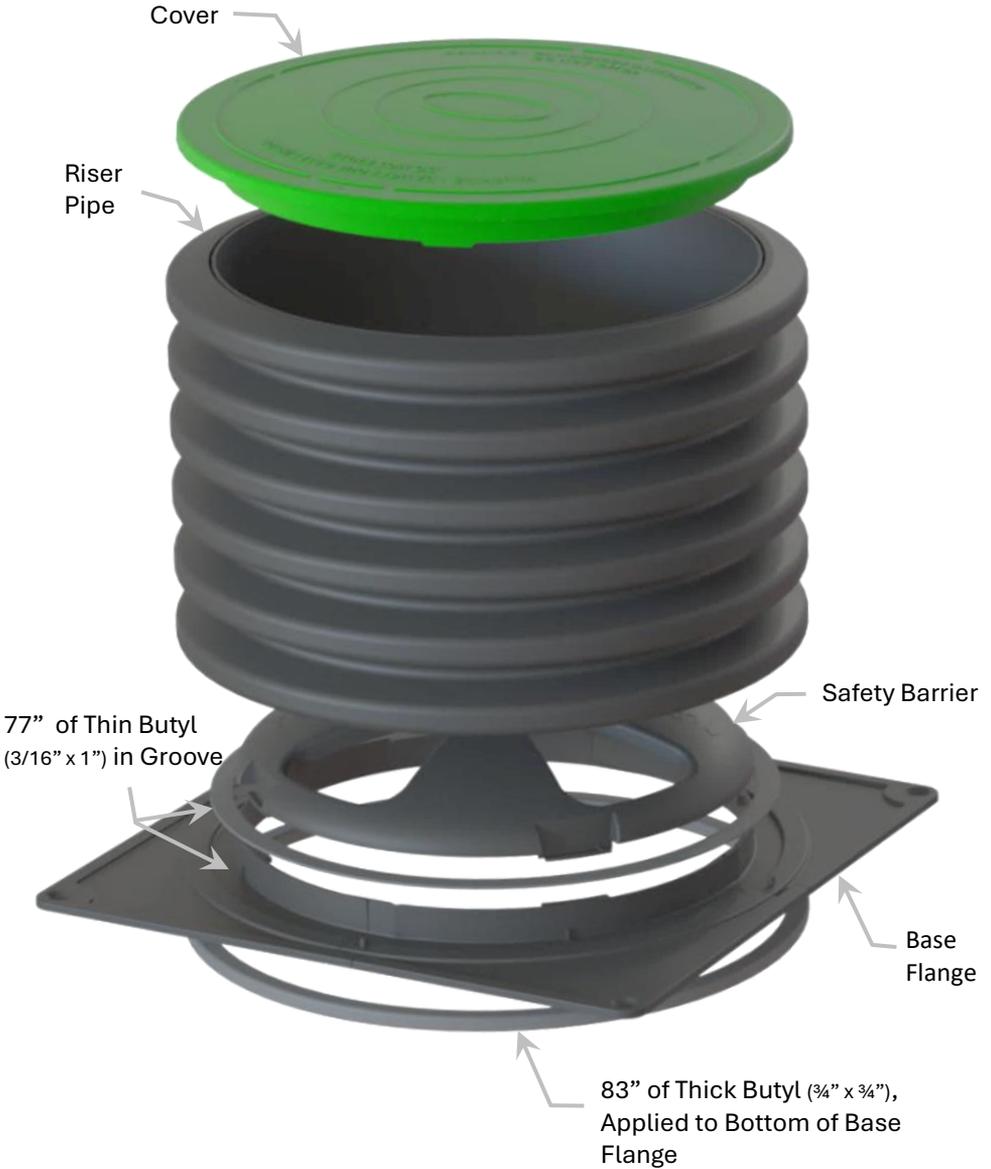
illustrates typical construction of septic tank riser kits 23" – 35" tall.
